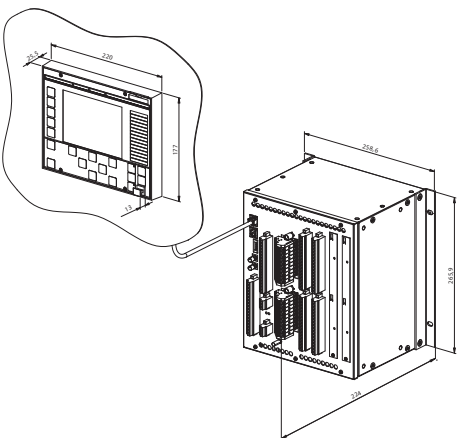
6U half 19" unit wall mounted with two mounting brackets and detached LHMI
